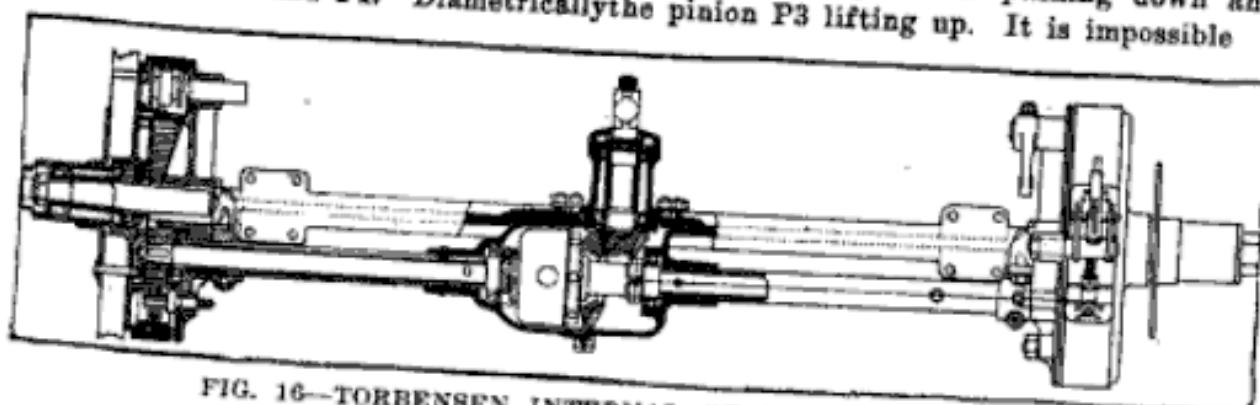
TORBENSEN INTERNAL GEAR DRIVE AXLE
